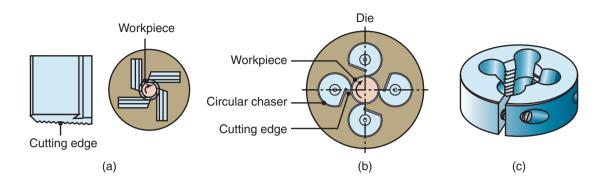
(a) Straight chasers for cutting threads on a lathe. (b) Circular chasers. (c) A solid threading die; the screw adjusts the gap.
